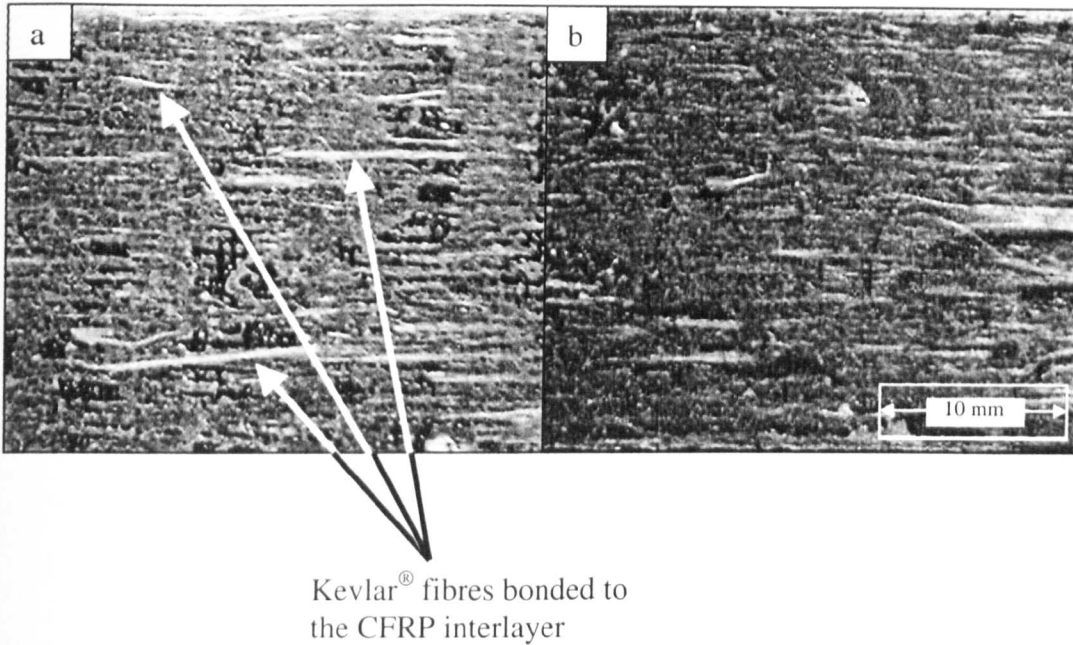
Fracture Surfaces following of Structure M following an MTPB test, (a) Kevlar fibres have remained bonded to the woven fabric carbon interlayer, (b) fracture surface of the Kevlar reinforced face-sheet, showing areas where the unidirectional fibres have been detached.
